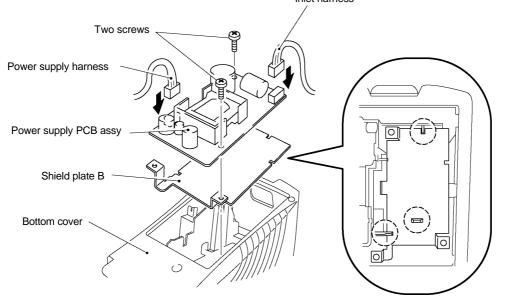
Reassembly of the Shield Plate B and the Power Supply PCB Assy
